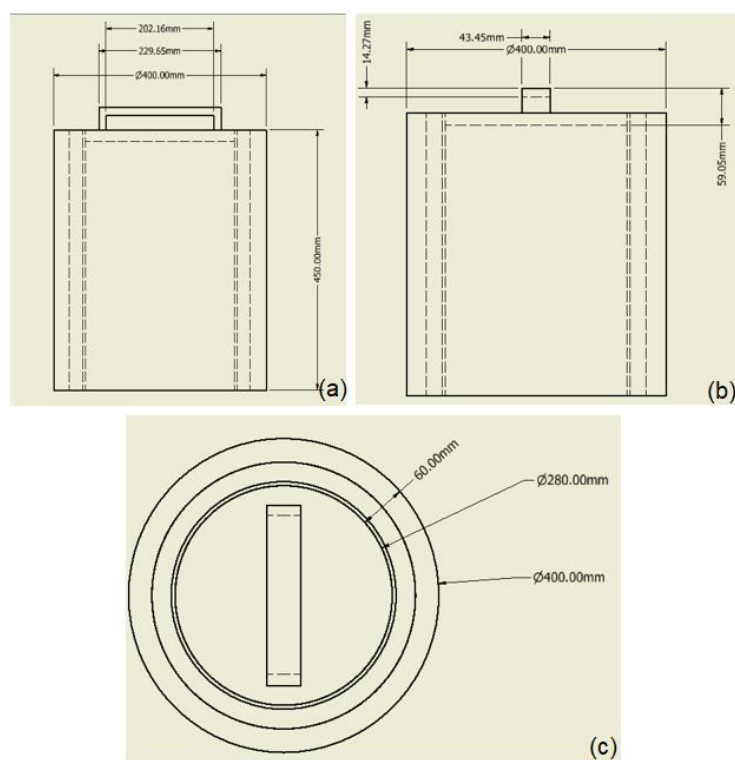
(a) Front view, (b) Side view, (c) Plan view
